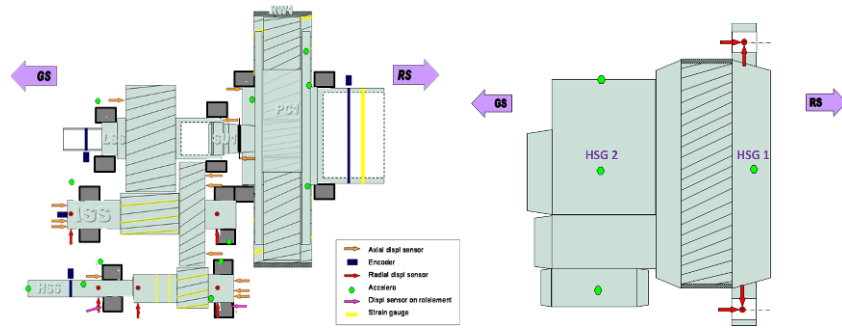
Sensor types and placement for the measurements performed on the investigated gearbox. GS: Generator Side, RS: Rotor Side
